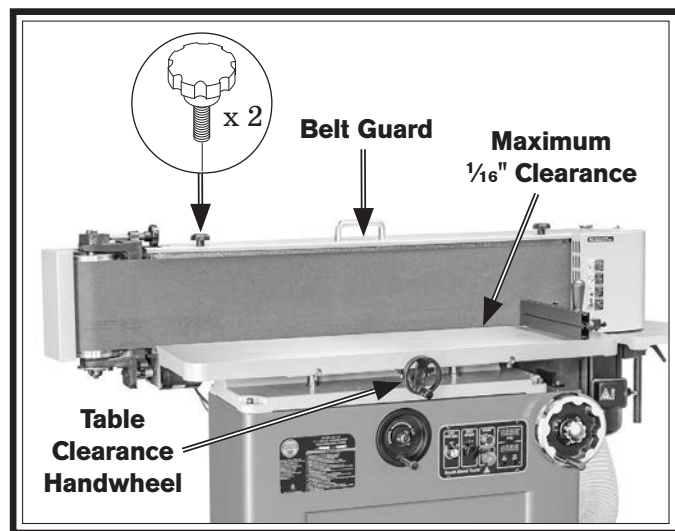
Belt guard lock knobs installed and location of table clearance handwheel.
